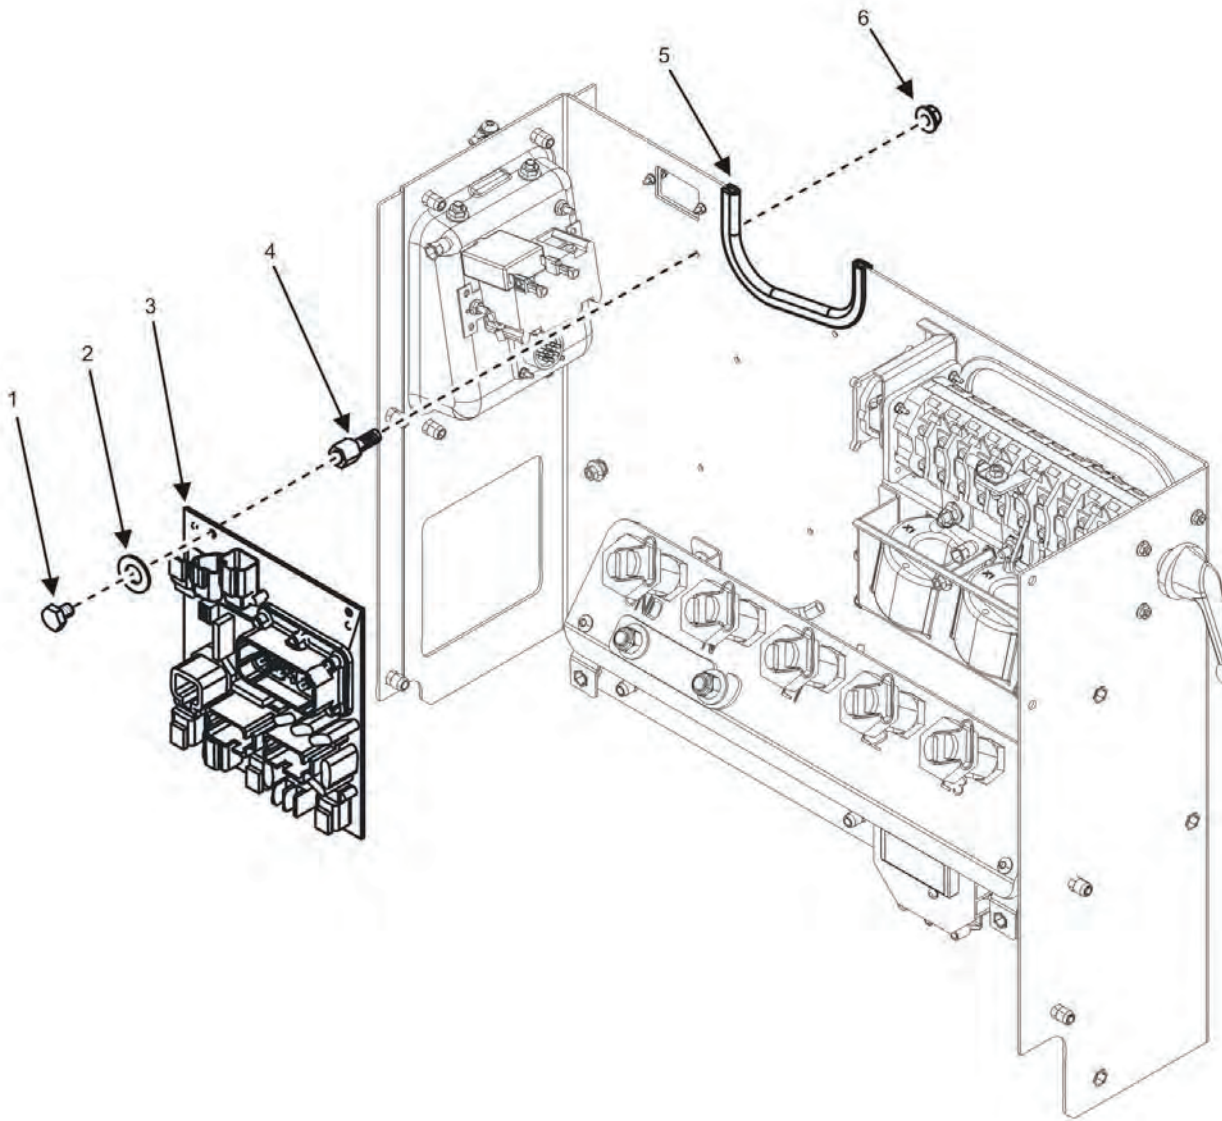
Printed Circuit Board Module (Sheet 1 of 3).
